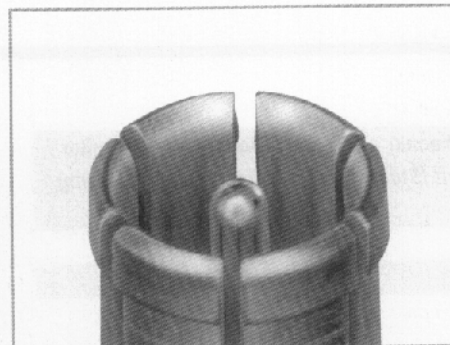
Contact with sextuple slit support socket, FCT standard contact
